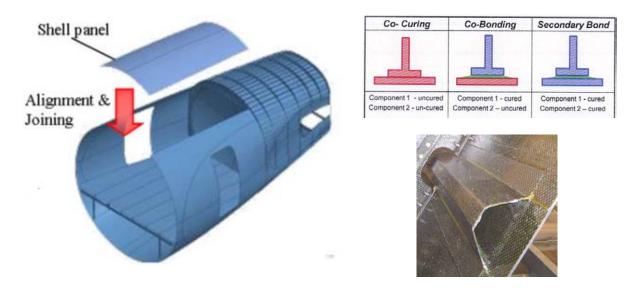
Examples of fuselage panel connection and composite stiffener assembly technics
